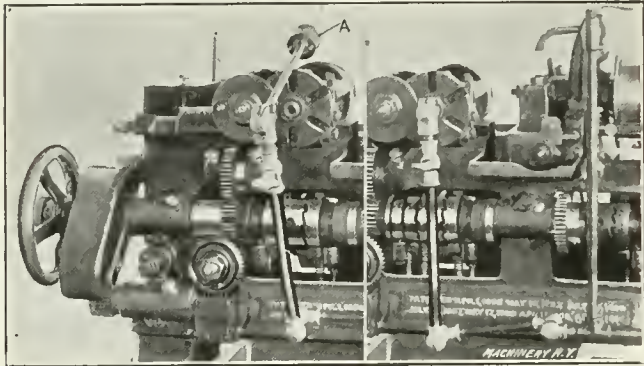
No. 00 Brown & Sharpe Automatic Screw Machine equipped with Oil-pumping Attachment for Turret Tools
